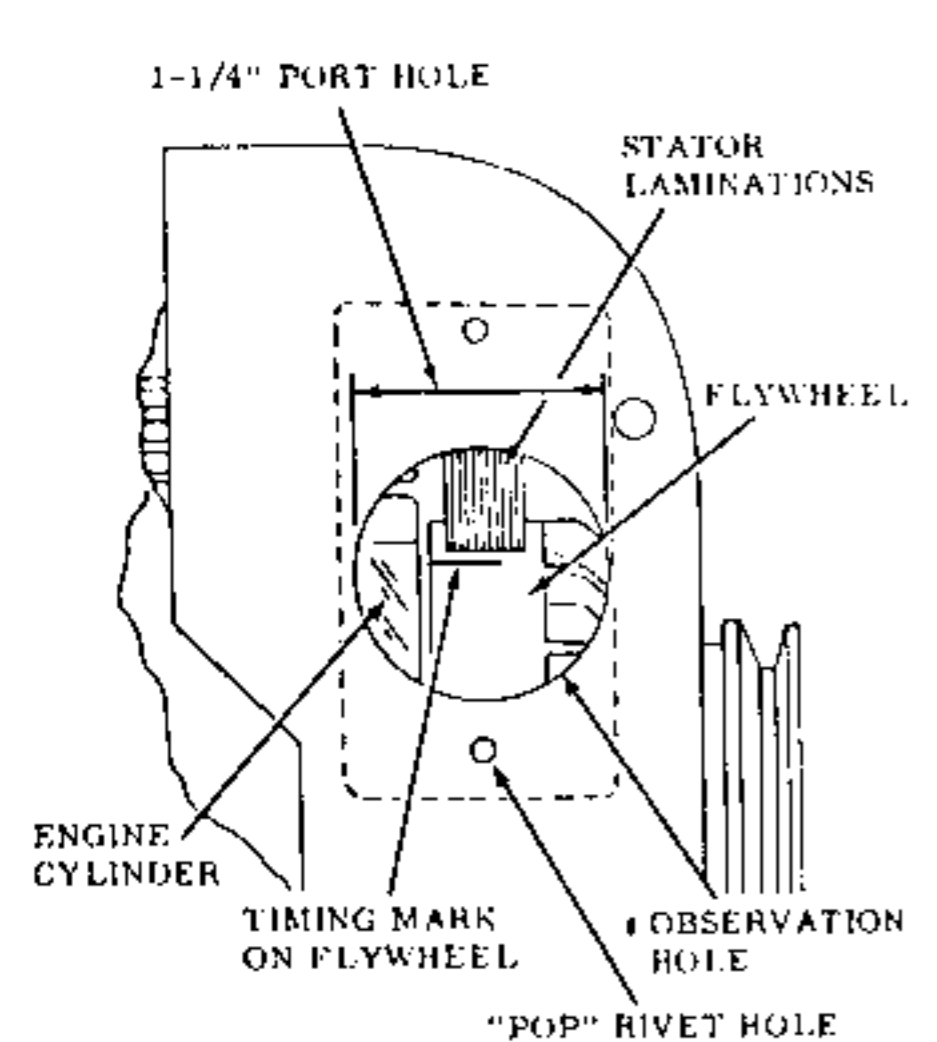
On Models HH80, HH100 and HH120, remove identification plate to observe timing mark on flywheel through port hole in blower housing.
